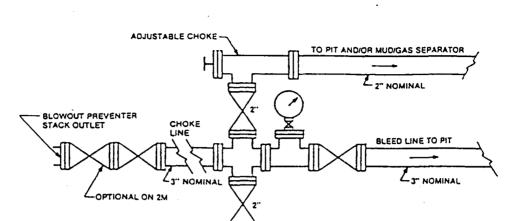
Typical choke manifold assembly for 2M and 3M rated working pressure service — surface installation.
